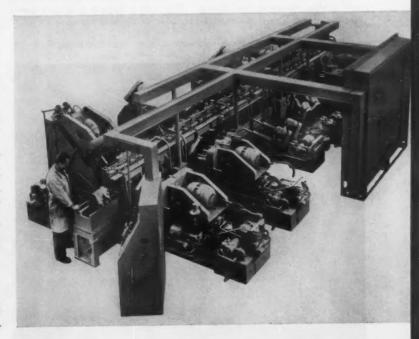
BarnesdriL Model 64 standard hydraulic drilling machine
